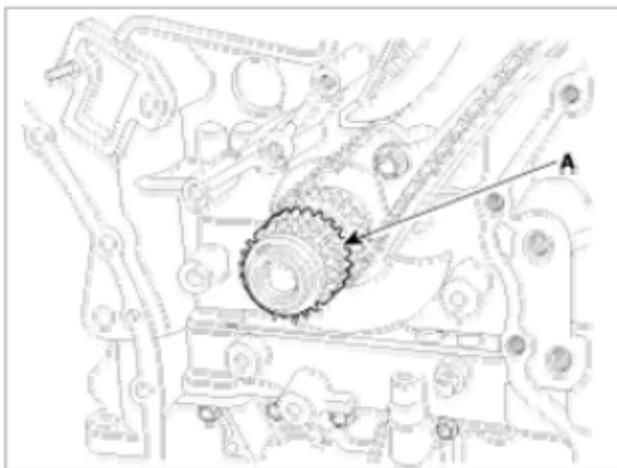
Locating Crankshaft Sprocket (Oil Pump & RH Camshaft Drive)
